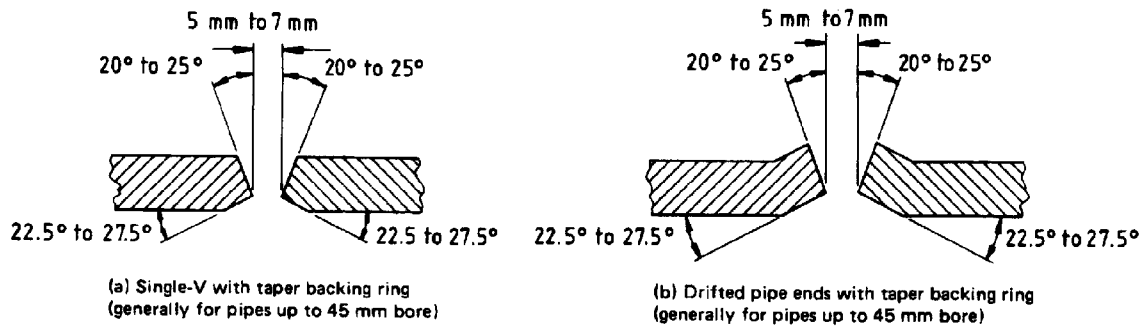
Typical butt joint preparations for use with metal-arc welding with backing ring where protrusion into the bore is not permissible
